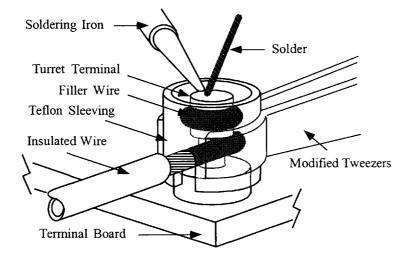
Turret Terminal in a High Voltage Assembly.
